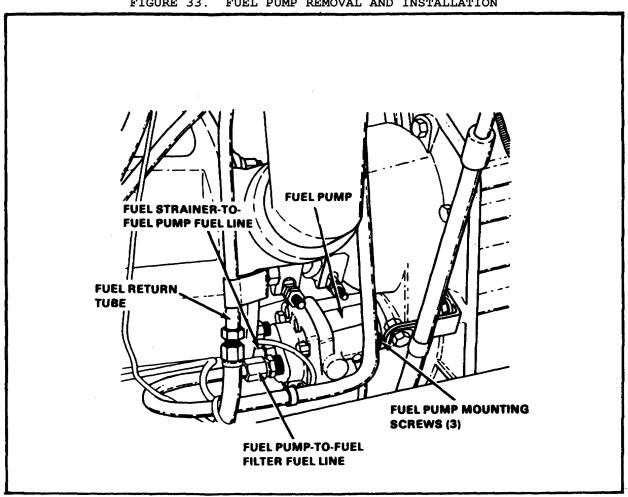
FUEL PUMP REMOVAL AND INSTALLATION
